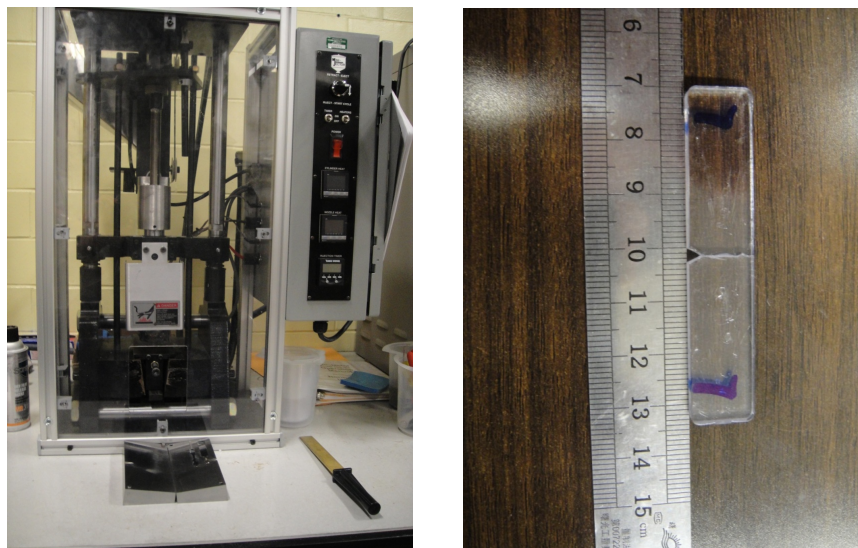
Mini-Jector model 45-3/4 injection machine, the V-mold, and the final injection specimen.
